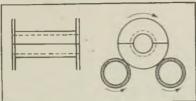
Split bobbin which, after assem-bly on core, can be rotated by pressing flanges against rubber-faced wheels
